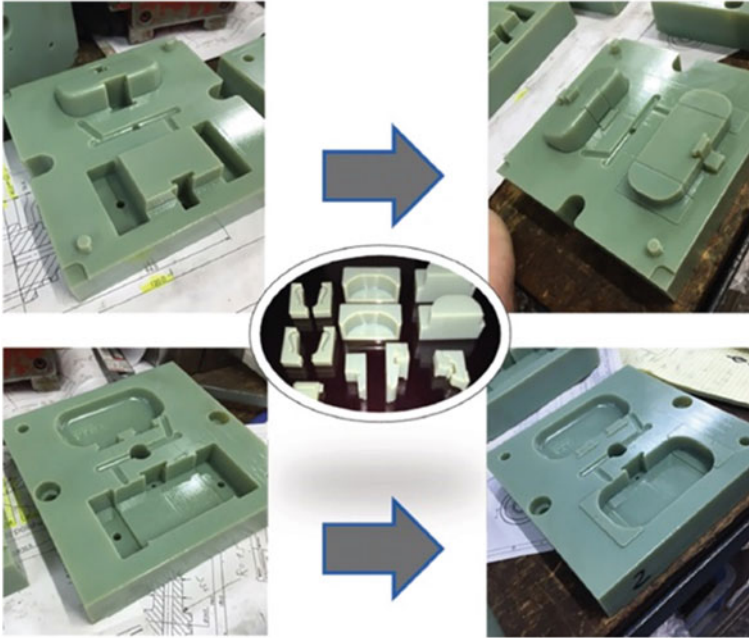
Multiply mould inserts (Courtesy of Stratasys)
